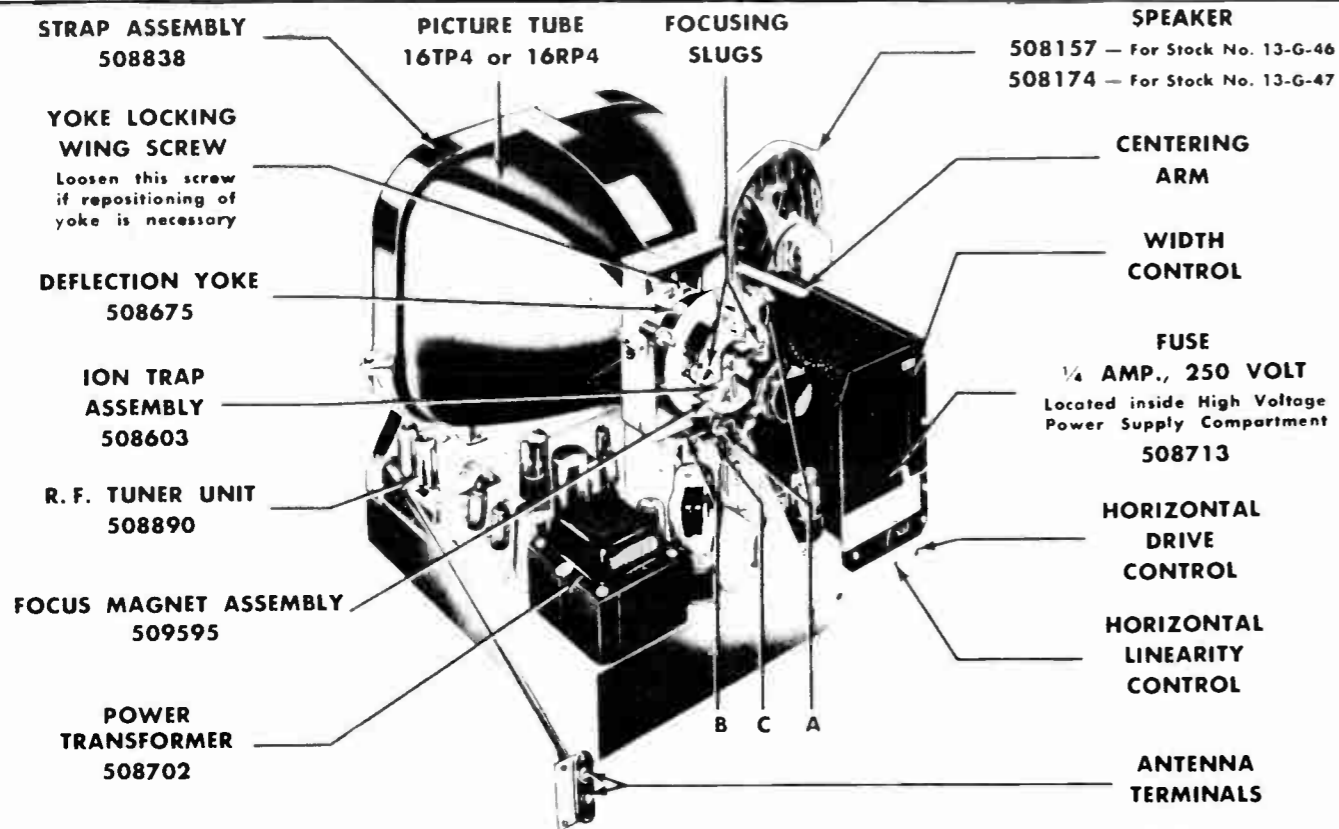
CHASSIS AND PICTURE TUBE ASSEMBLY
